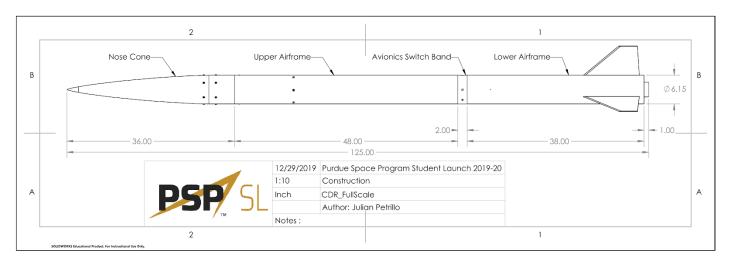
Full-Scale Launch Vehicle Dimensional Drawing
